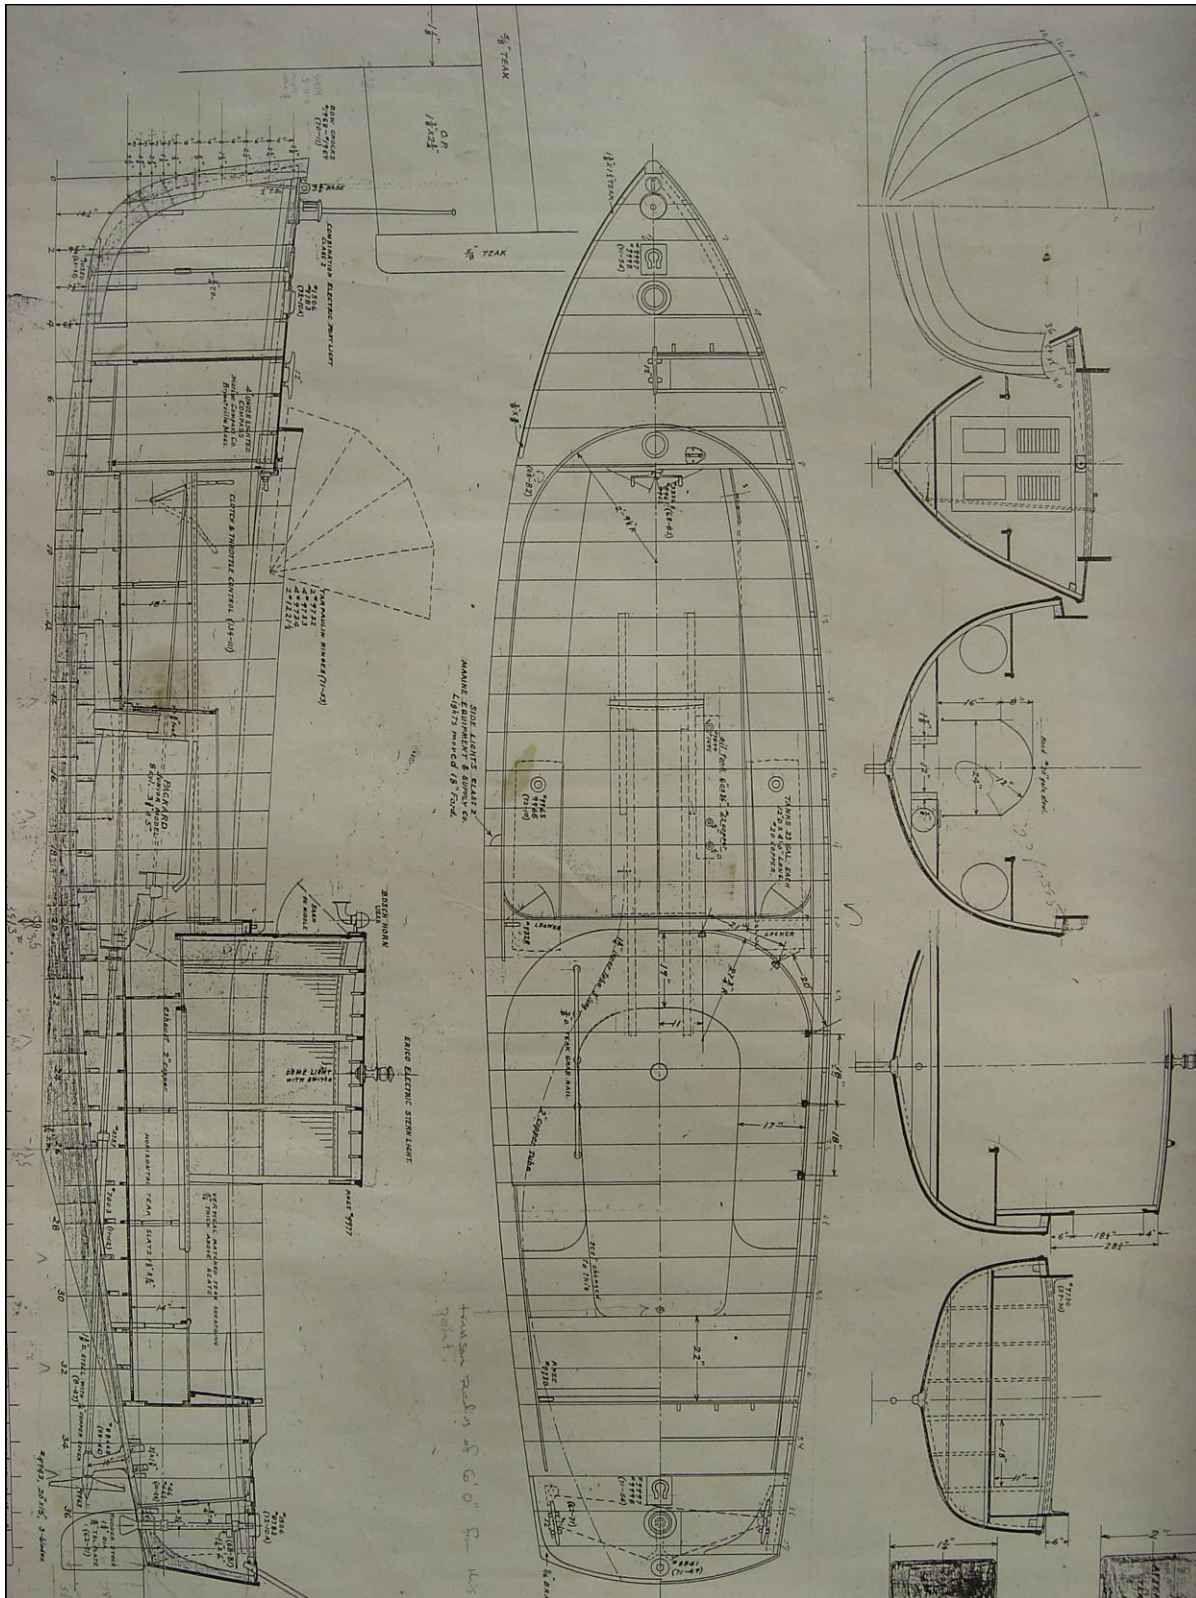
CORSAIR HMCo #381 Herreshoff Manufacturing Company Construction Drawing 002-105, 1925
